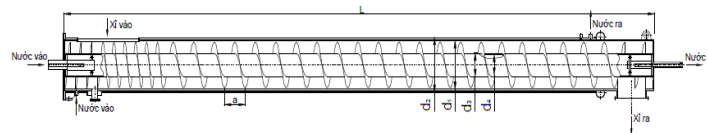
Modelizing screw-type industrial slag cooling equipment
